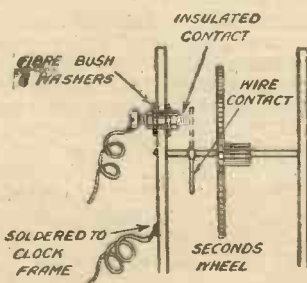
Side view of the mechanism, showing how the contacts are mounted.
